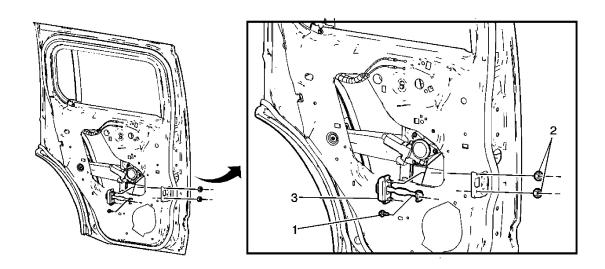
Rear Door Check Link Replacement Courtesy of GENERAL MOTORS CORP.
